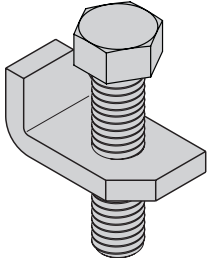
B Rod Stiffener with Break-Off Bolt Head
